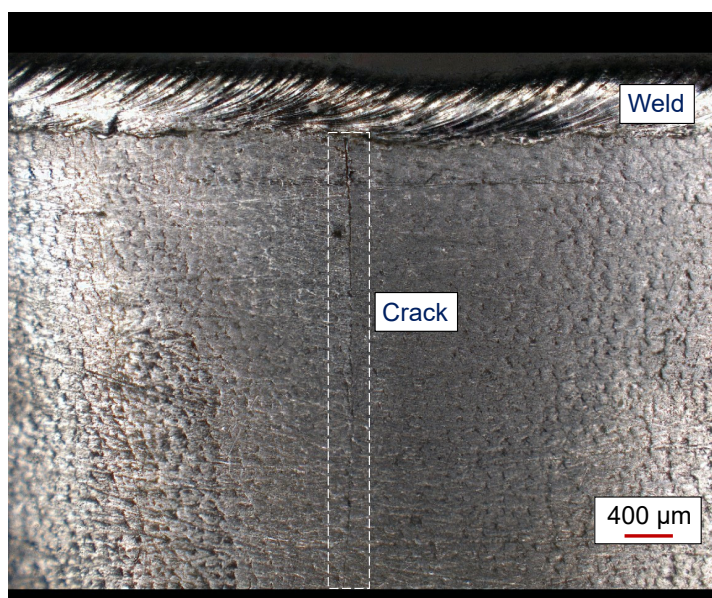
A crack detected after welding of the LANL Capsule 2B during optical inspections, the crack initiated via welding process.
